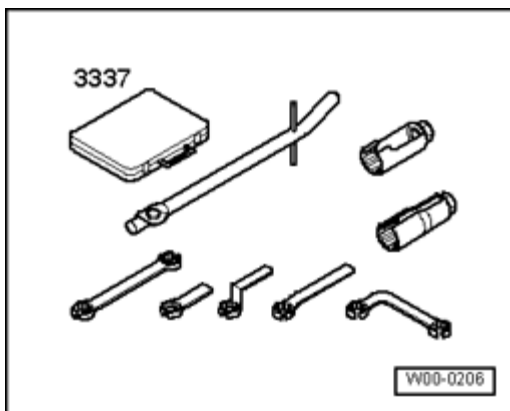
Identifying Ring Spanner 7-Piece Set 3337
